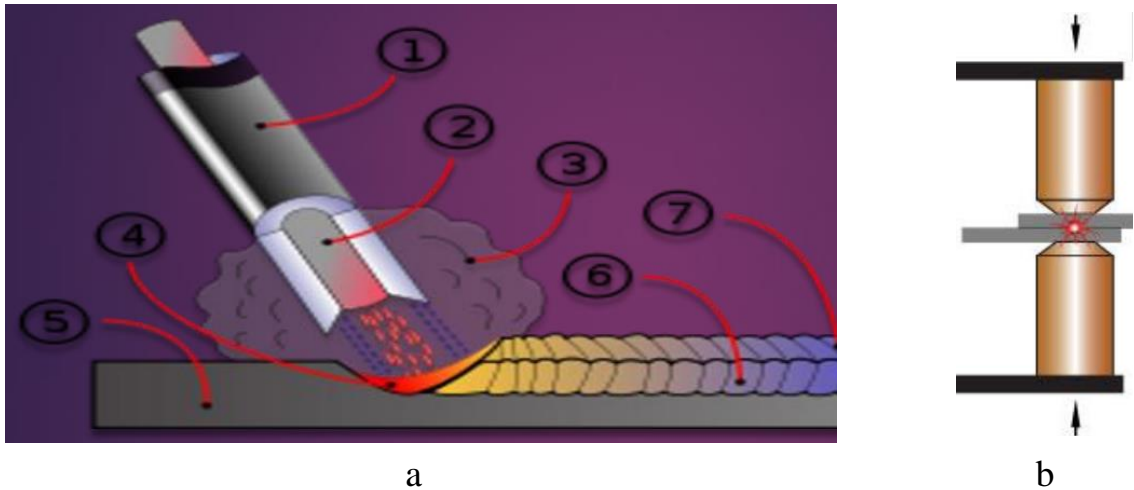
Arc welding (a) and electric resistance welding (b)
